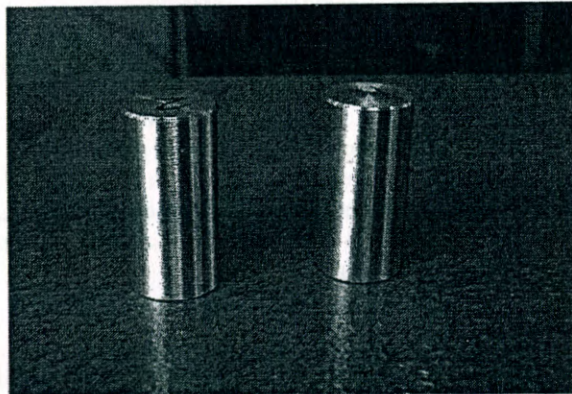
Casting after machining, which was simulated (filling and solidification)
